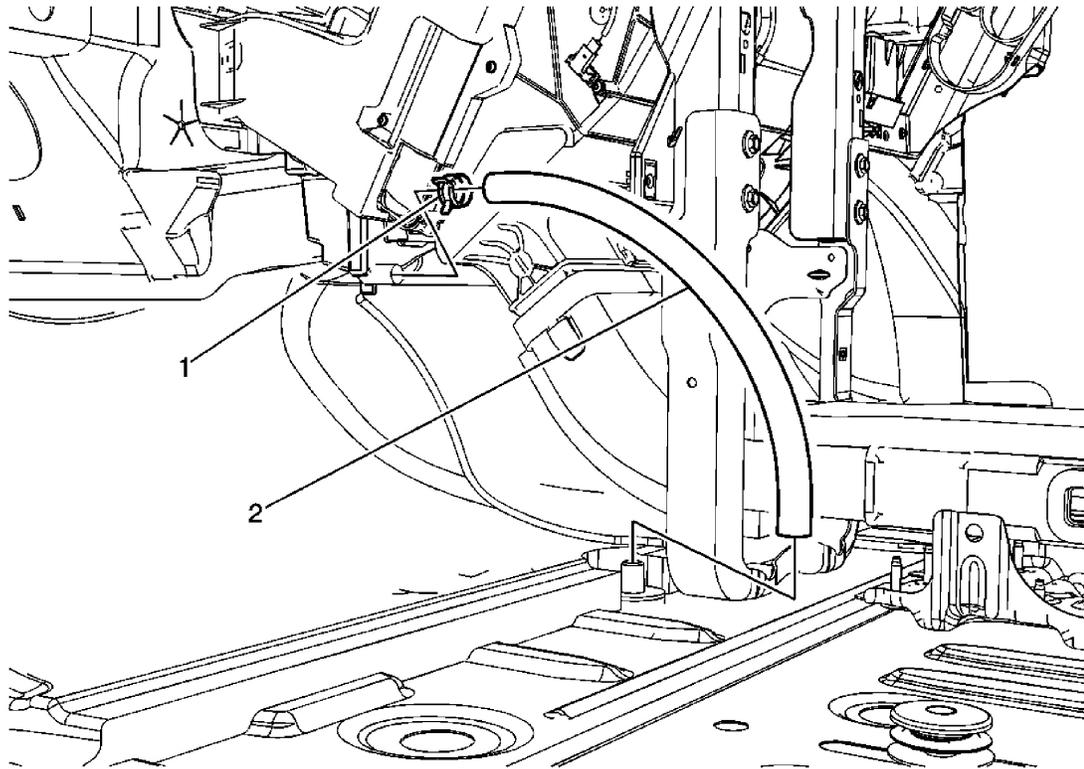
View Of Air Conditioning Evaporator & Blower Module Drain Hose
